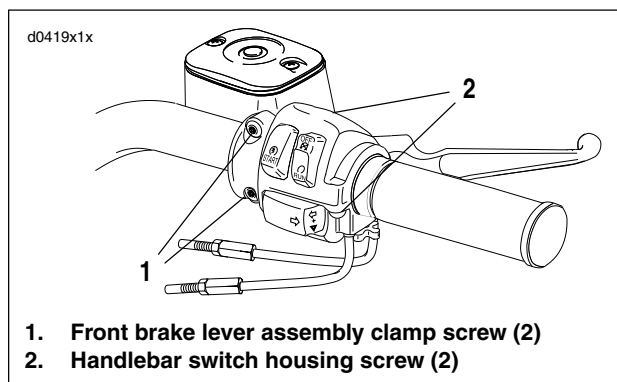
Handlebar Lever and Control Mounting Screws (Right Side Shown)
